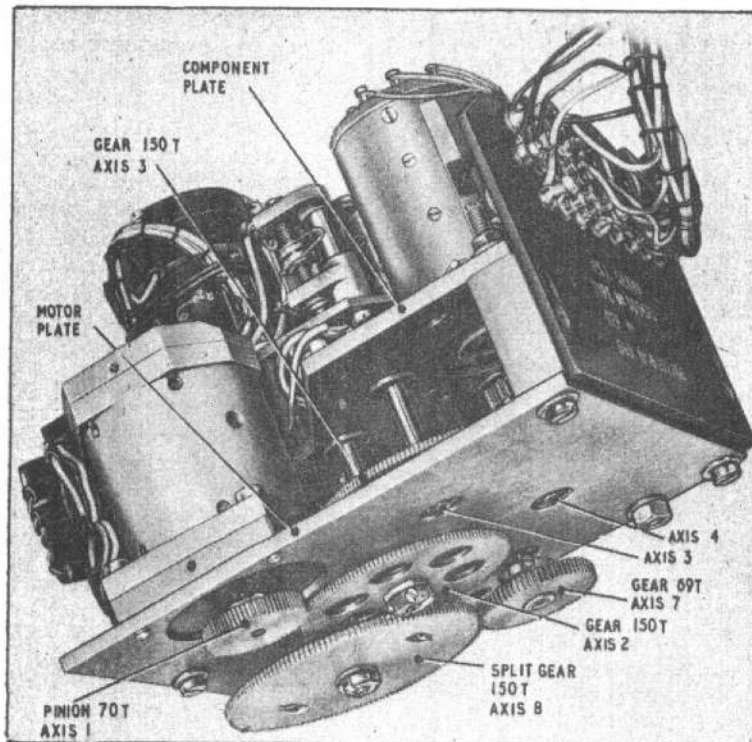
Vertical speed output gearbox assembly (G4)—view B
